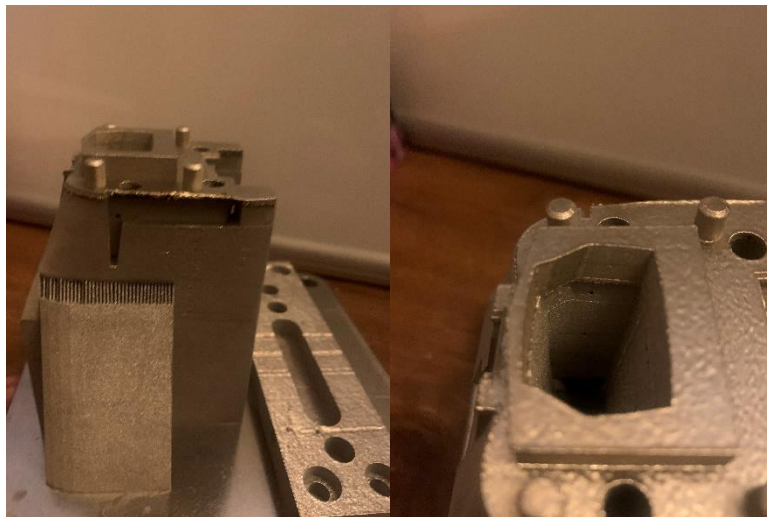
Images of print failure of trailing edge. (left) Exterior lip showing where powder moved away from part, (right) Interior showing step that required reprint.
